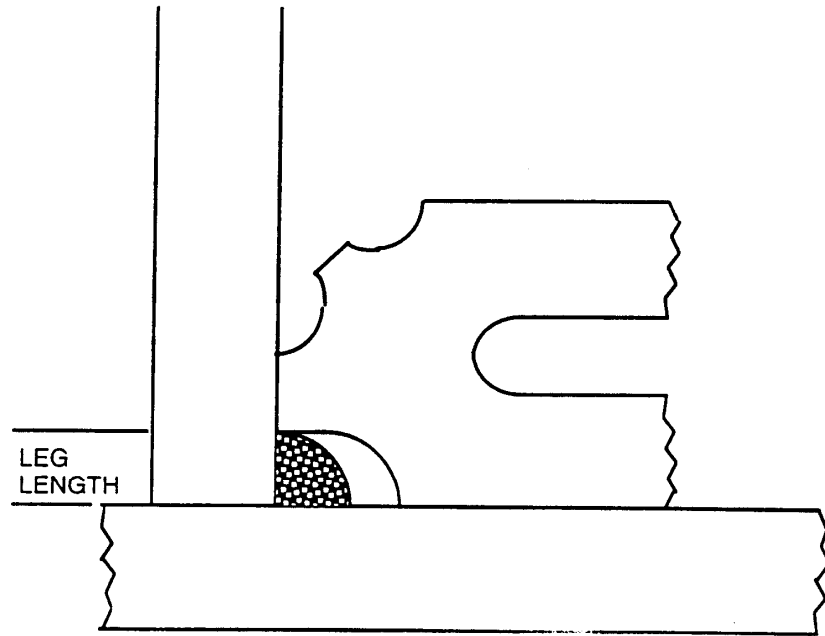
Measuring Convex Fillet Weld Size
